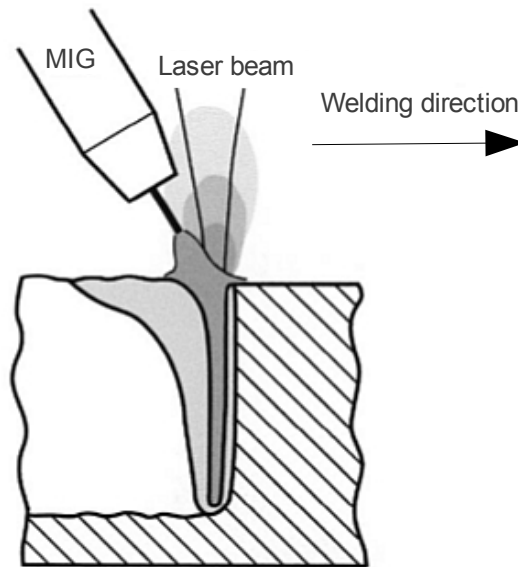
Schematic view of laser-hybrid welding process [15]
